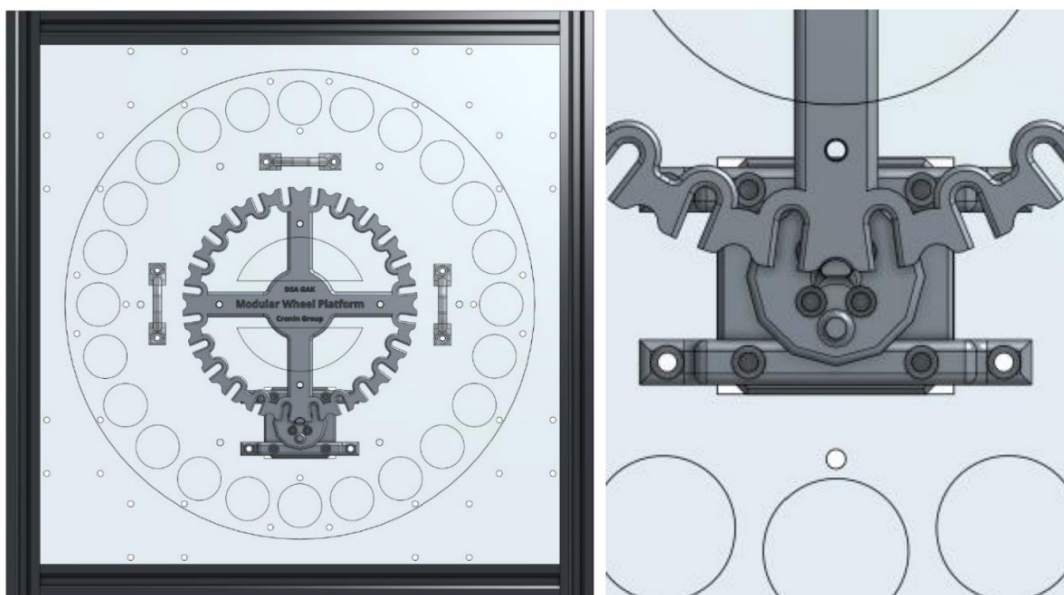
Geneva Wheel Mechanism. (Left) Overhead view of the entire platform showing 3D-printed Geneva wheel assembly and vial tray supports in filled dark grey. (Right) Close view of the Geneva mechanism. Reproduced from Salley et al.⁷
